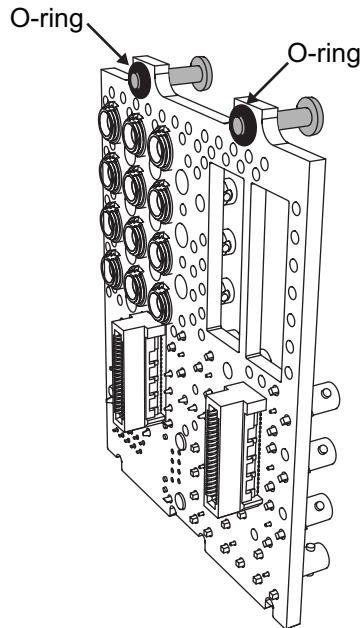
Location of the O-ring on the 8322AR-317 Rear Module
